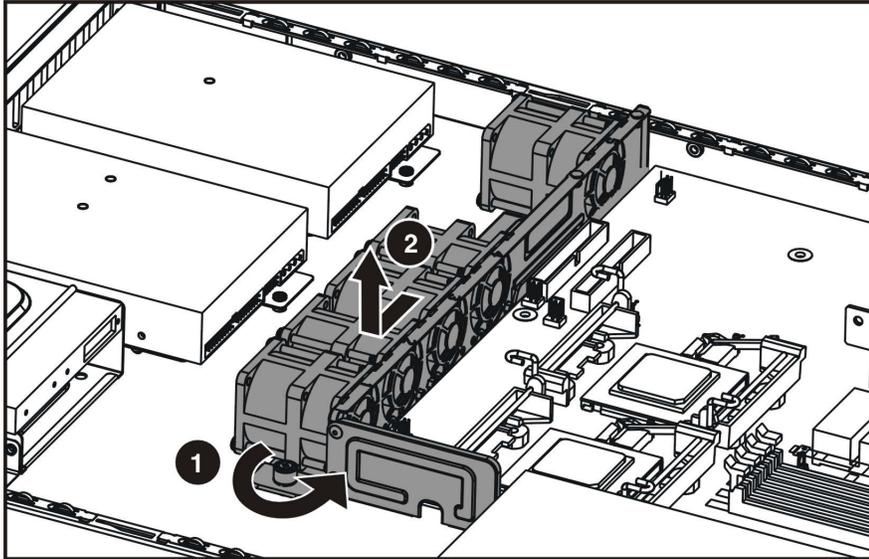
Unlocking the fan bracket and clearing the fan bracket alignment tab
